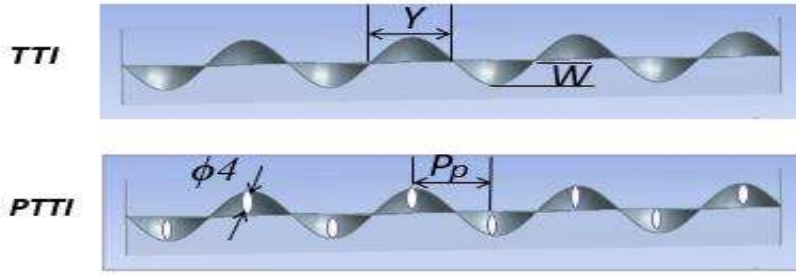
Dimensional and pictorial configuration of modified turbulators inserts [TTI, PTTI].
